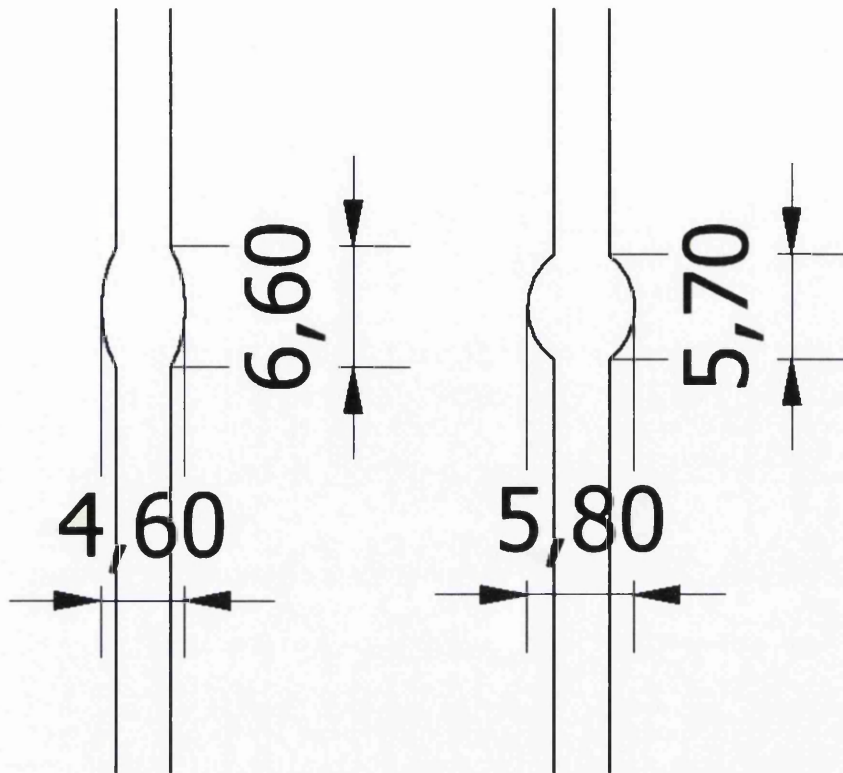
Geometries of over-performing weld (left) and under-performing weld (right)
